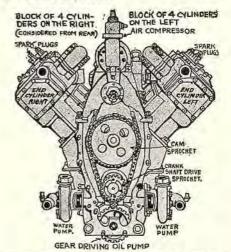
Front view of an eight-cylinder "V"-type engine.
